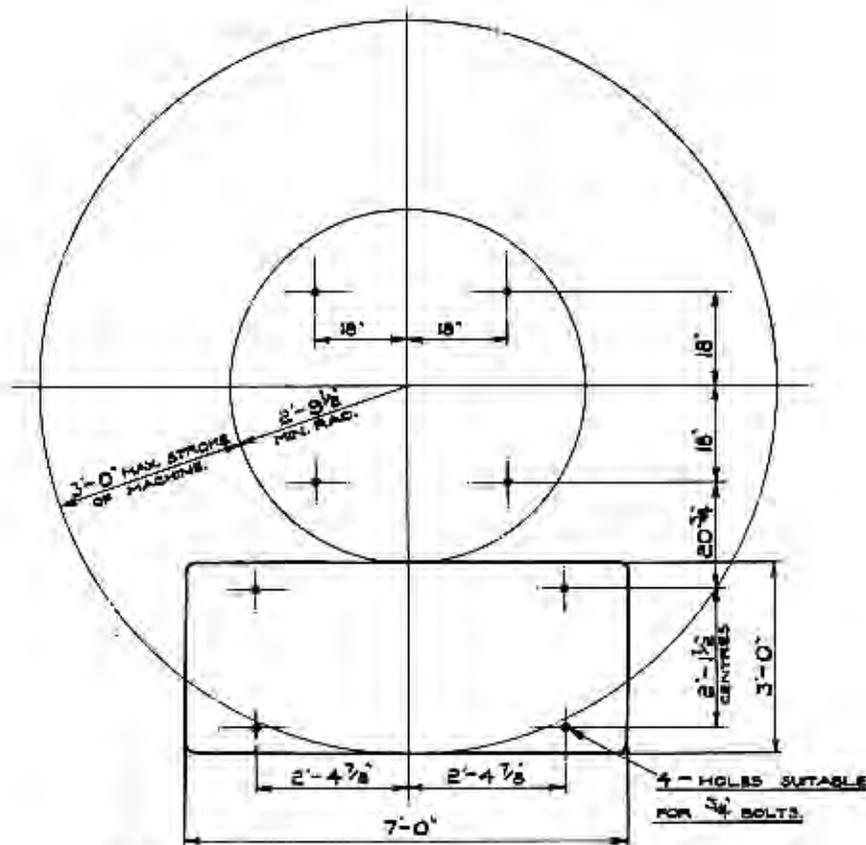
PLAN OF BOLT POSITIONS FOR FIXED TABLE.
